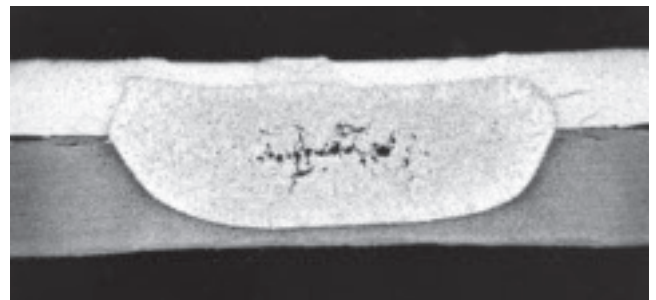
Commercial-quality spot weld in 2 mm 6082 to 1.2 mm 6016. (Reproduced by permission, TWI Ltd.) The shrinkage cracking within the center of this weld is not uncommon in commercial-quality aluminum spot welds, particularly in the more crack sensitive 6xxx series materials. These types of discontinuities in the center of the weld nugget do not dramatically reduce the weld's strength as the majority of the applied load to this type of joint is at the edges of the nugget. On testing, such a weld would normally fail by tearing out from the thin sheet, leaving a button the same diameter as the weld nugget on the other sheet.
